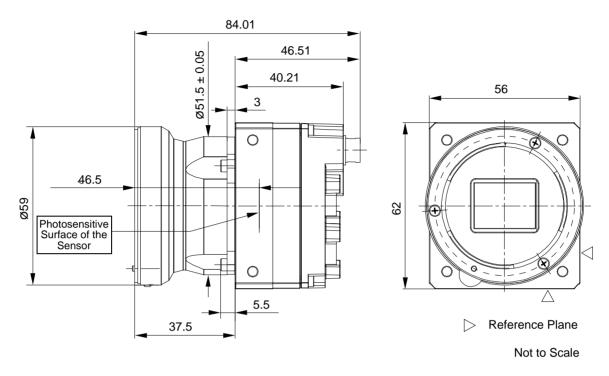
F-Mount Adapter on a Basler beat Camera Link Camera; Dimensions in mm
